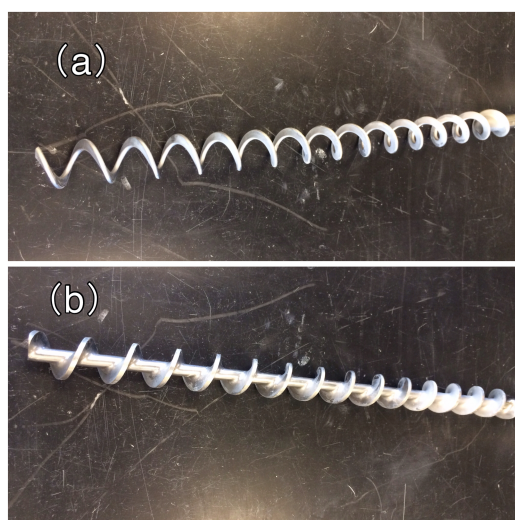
screw designs. (a) open helical screw called helix. (b) helical screw with center shaft called screw.
